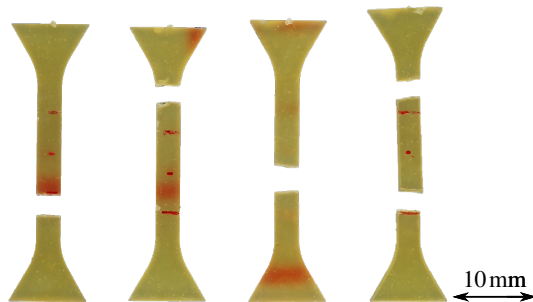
Fracture modes dovetail specimens (specimen numbers 3, 4, 10, and 11)
